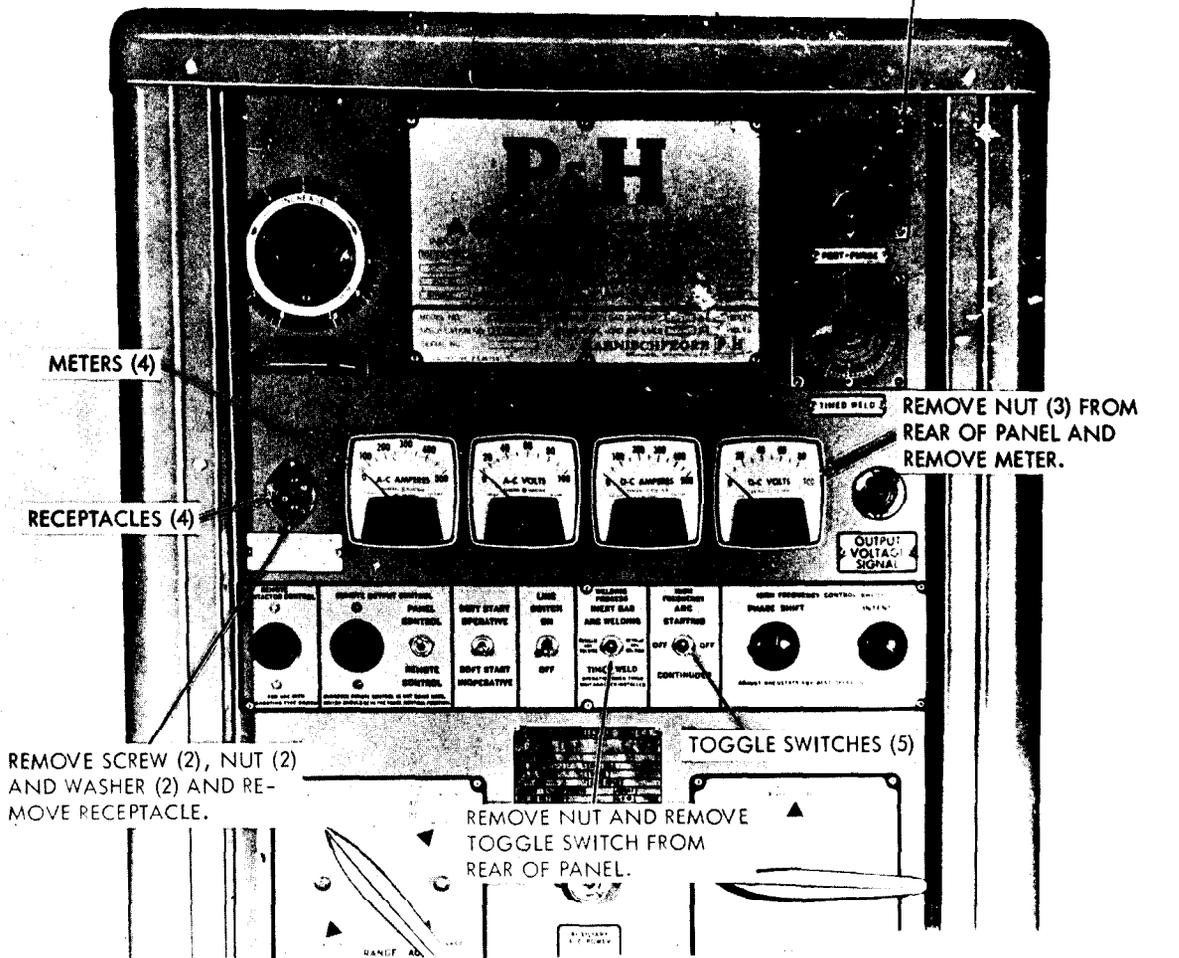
Upper control panel components, removal and installation, Model DAR-300HFSG.
